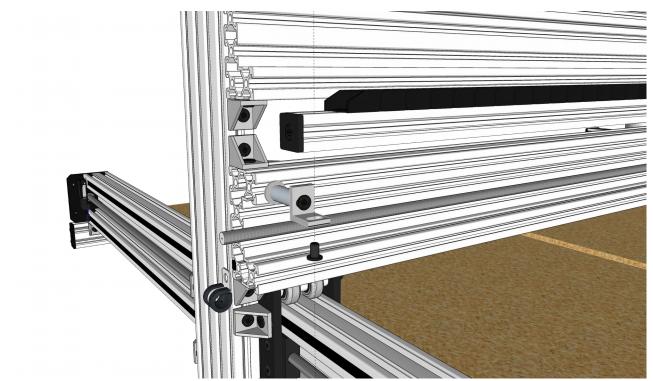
LEAD CNC Machine 1515 Disassembly: Remove Cable Chain Carrier
